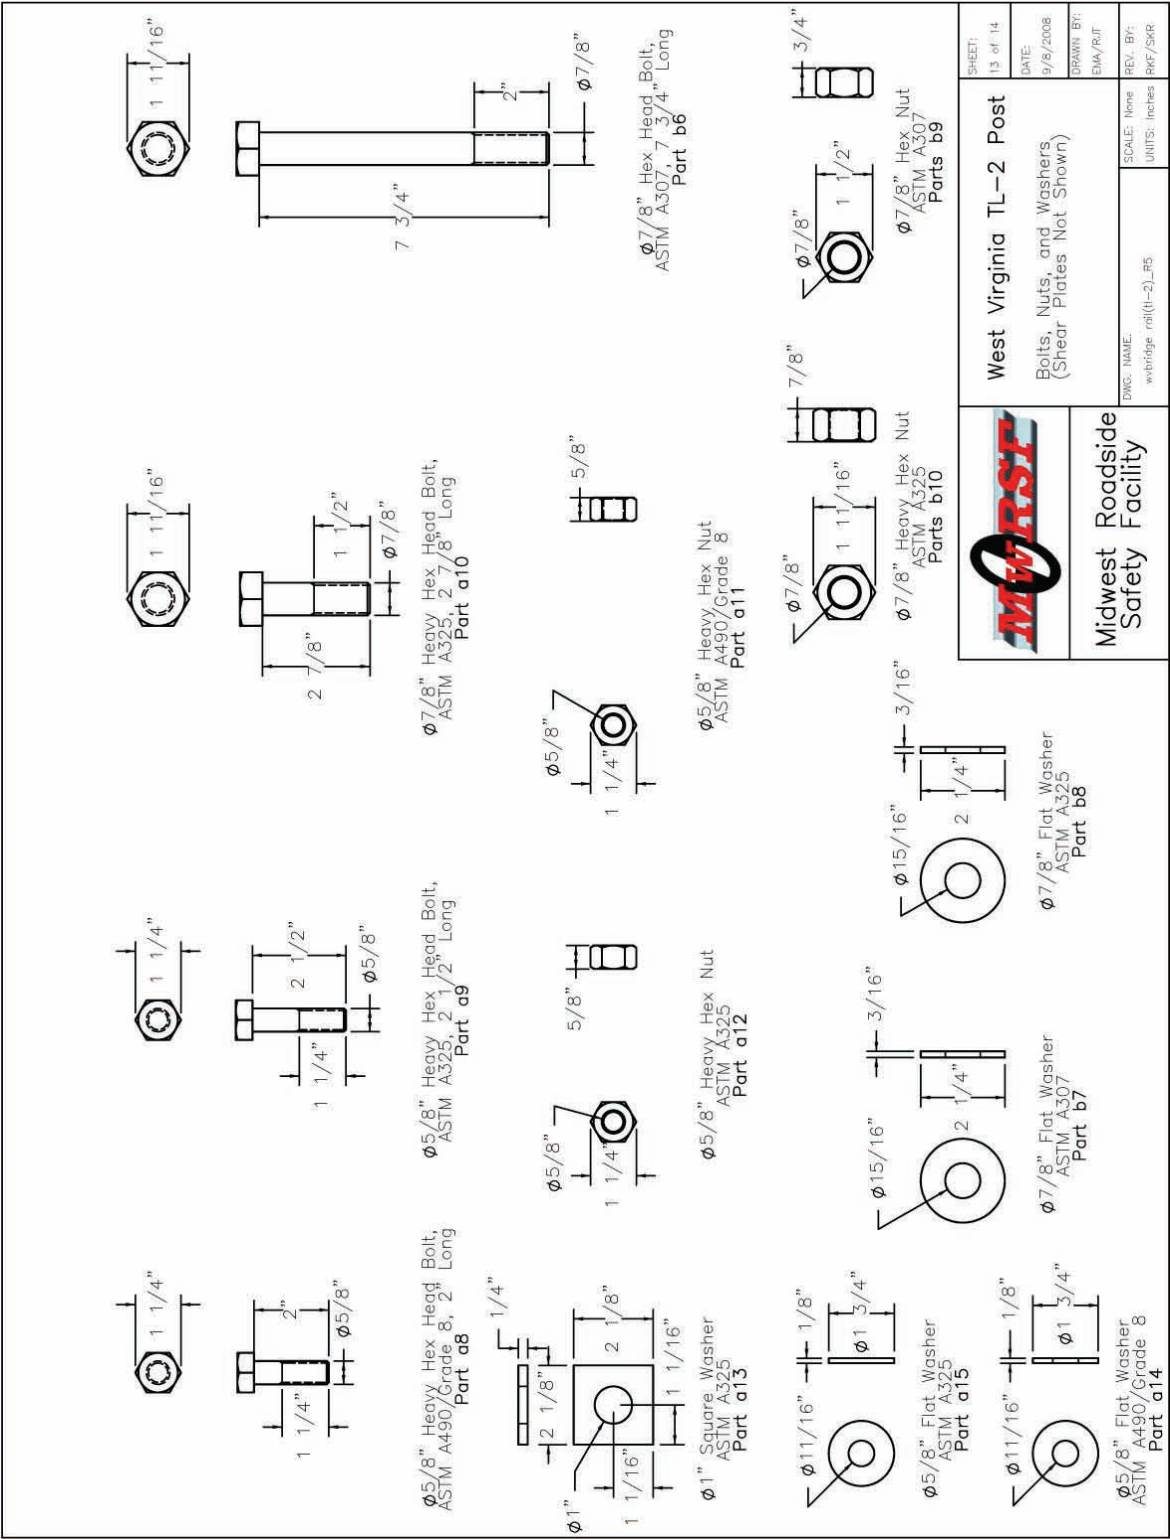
Steel Fastener Hardware – Bolts, Nuts, and Washers
